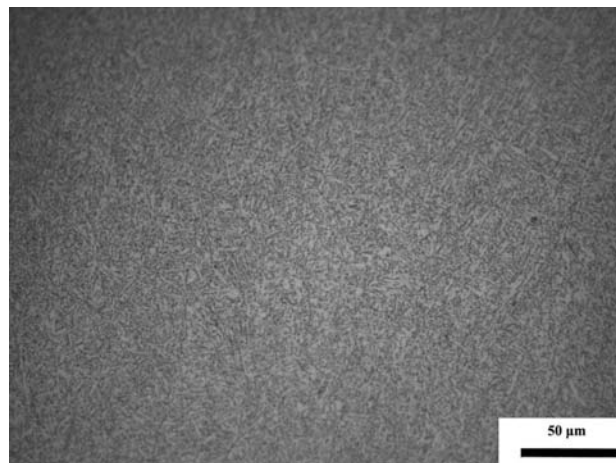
Weld metal- Acicular ferrite and carbides
